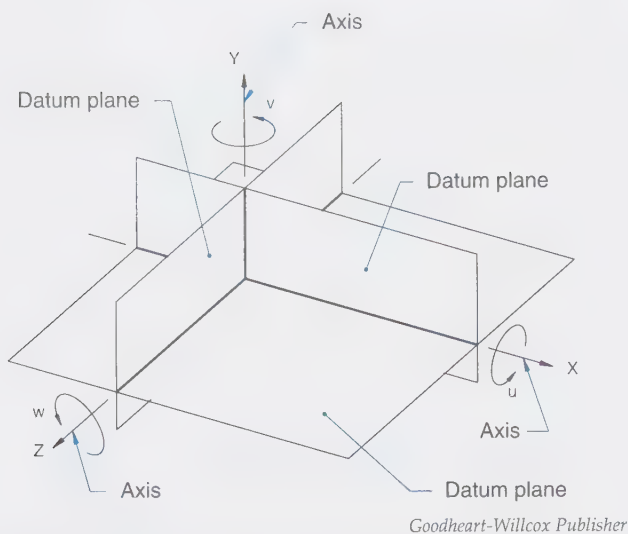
A datum reference frame is theoretically perfect and is made of three mutually perpendicular planes.
